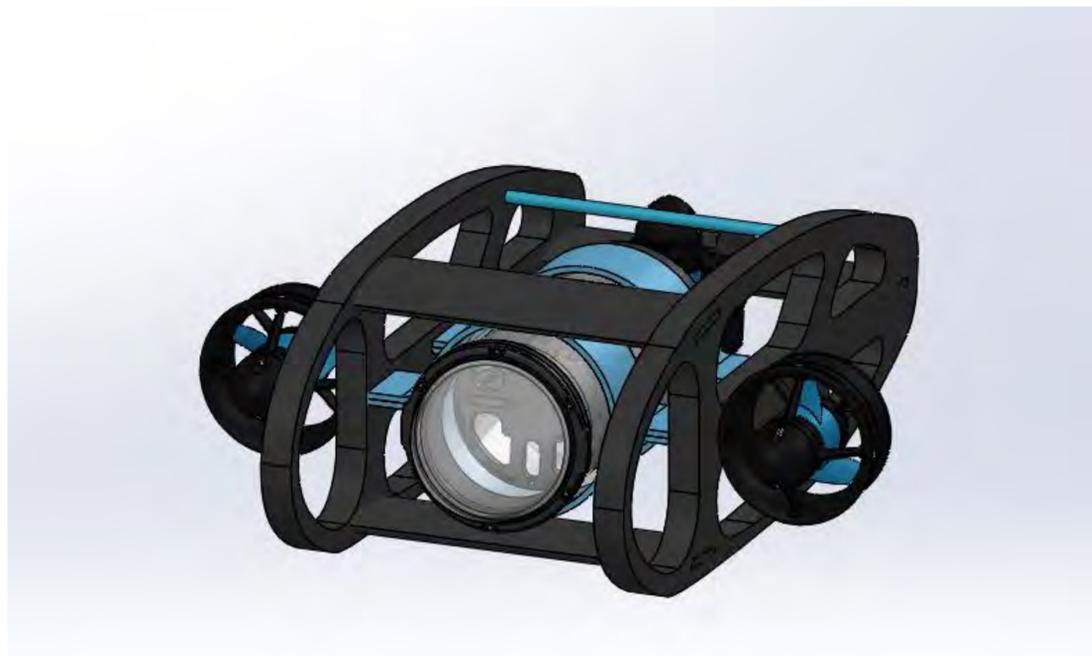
Isometric view of assembled Gulfarium Build Your Own ROV. This is a simple easily assembled, high quality ROV design. The frame can be 3D printed allowing for low cost per unit and easy, on-demand production.
